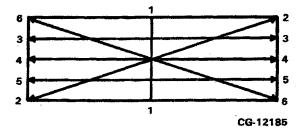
Crankcase Deck Flatness Checking Pattern
